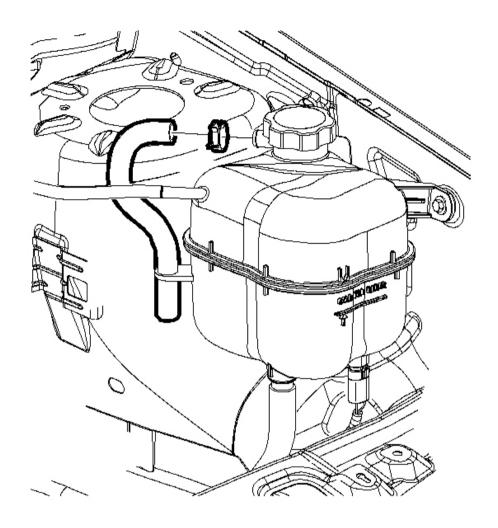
Installing Coolant Surge Hose & Clamp Courtesy of GENERAL MOTORS CORP.
